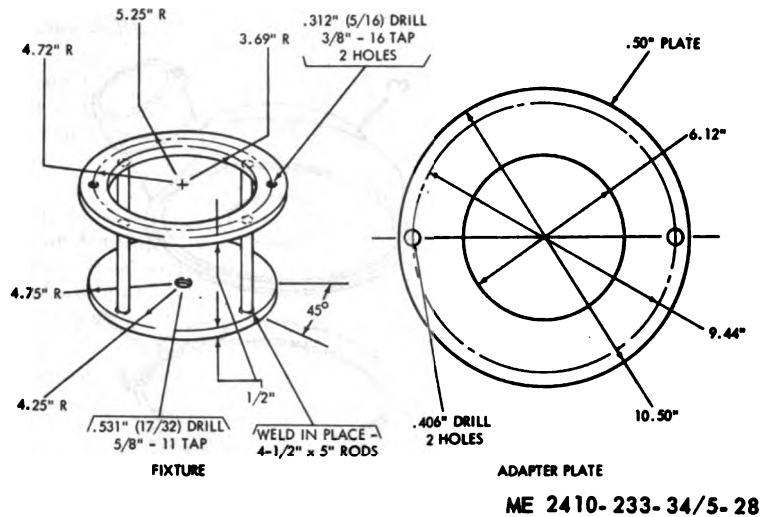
Turbocharger mounting fixture and adapter plate.
